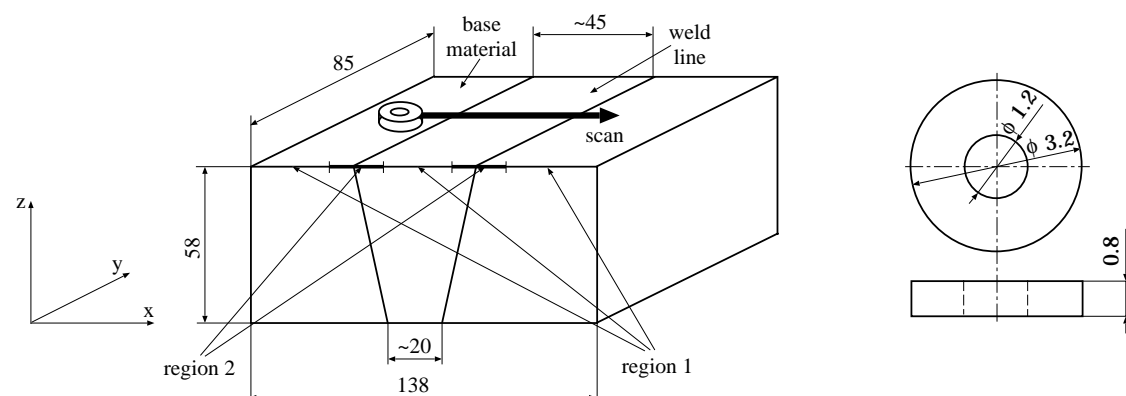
Configuration and dimensions of the specimen and pancake coil.
